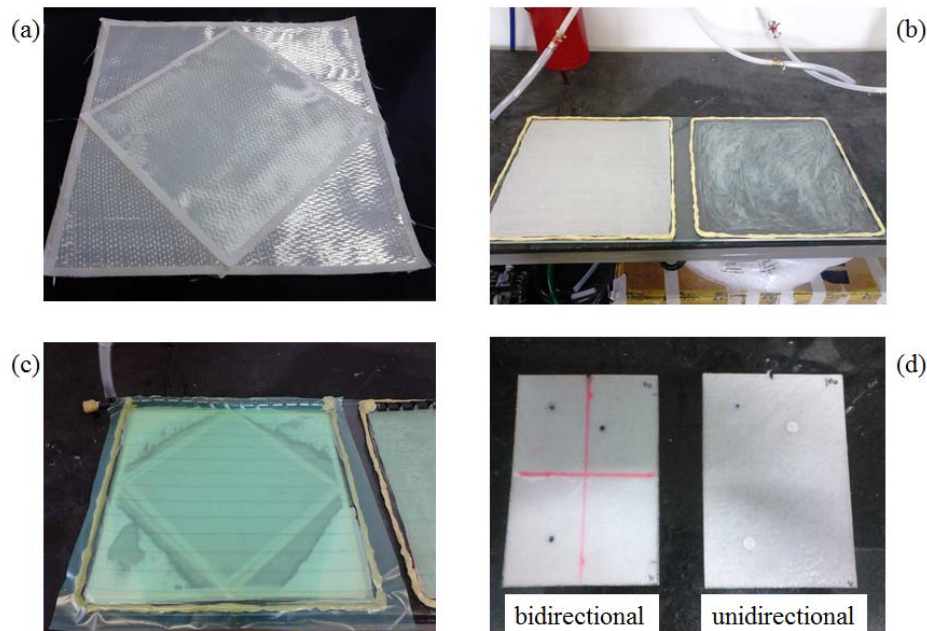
Vacuum Infusion Processing (a) Cut and preparation of the composite layup, (b) Vacuum bag, (c) Vacuum bag and resin drive, (d) Composite specimens
